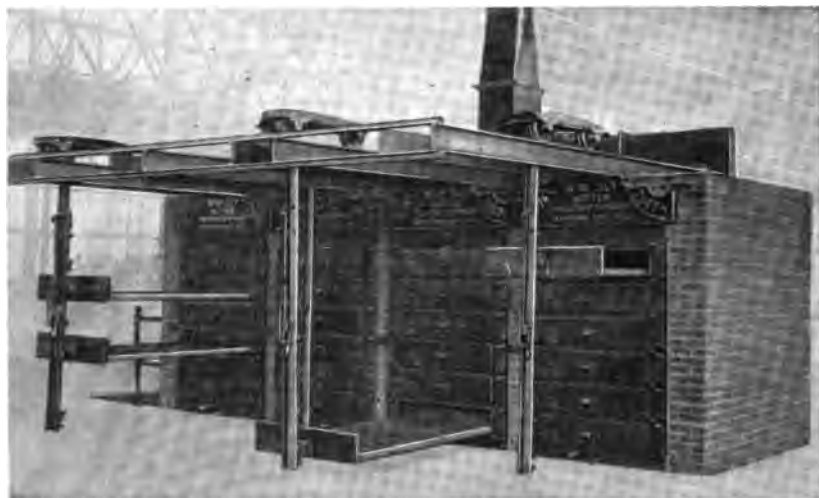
SEC. 10j.—Drawer type of core oven, showing one drawer pulled out.
